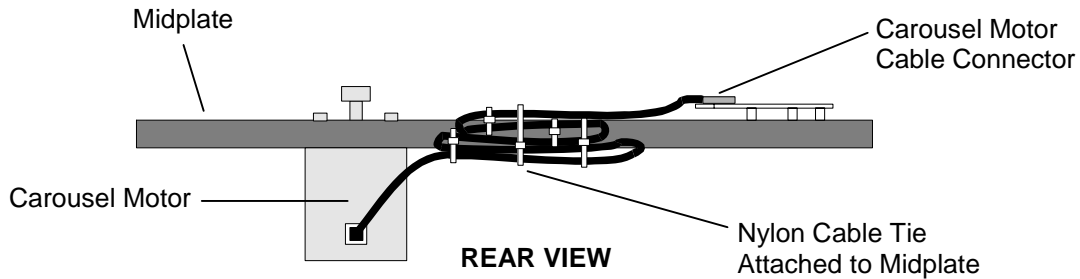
Carousel Motor Nylon Cable Ties at Rear of 62xx and 82xx Libraries
